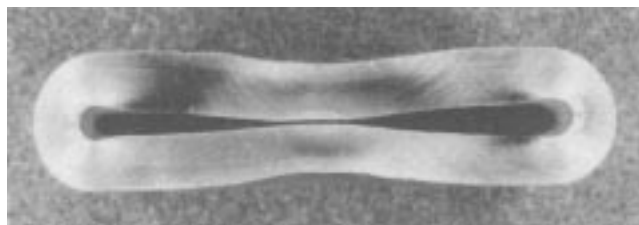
Annealed flattening-test ring from nose end of Tube 10B, tested per ASTM A 450. 0.9 \times
